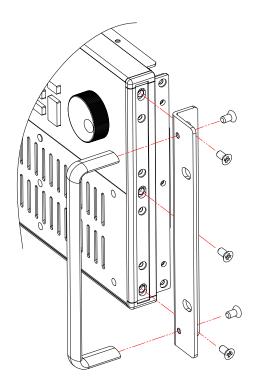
Installing the Rack Mounting Kit & Handle of 62050P
